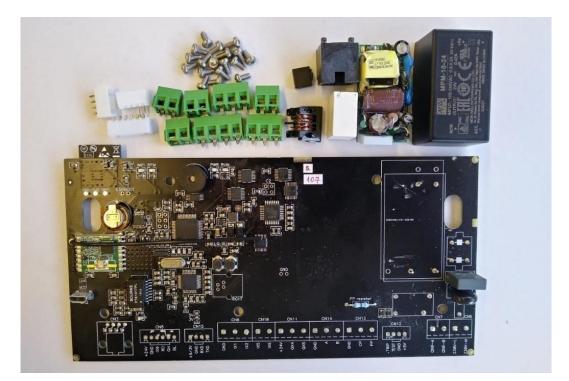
Printed circuit board with electronic components F-1813 PCB EVC-charging station mockup/P.
